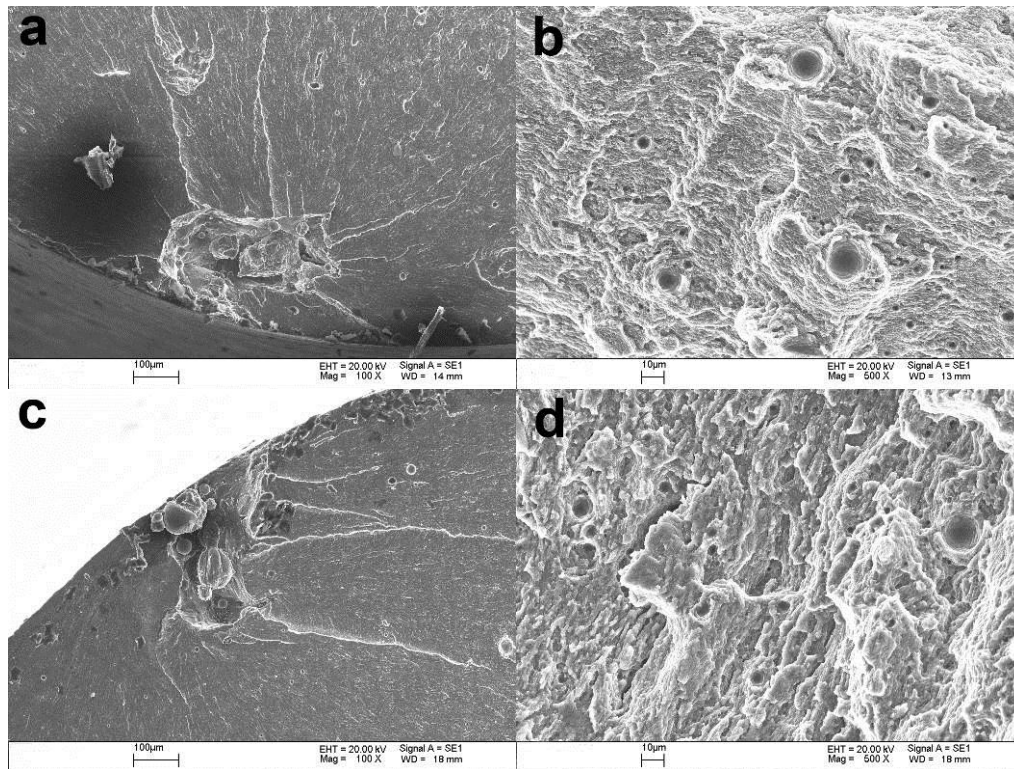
Typical fracture surfaces of two samples of batch #13 (300°C/0°/as-built): (a) crack initiation site and (b) area of forced fracture of sample #13.4; (c) crack initiation site and (d) area of forced fracture of sample #13.9
